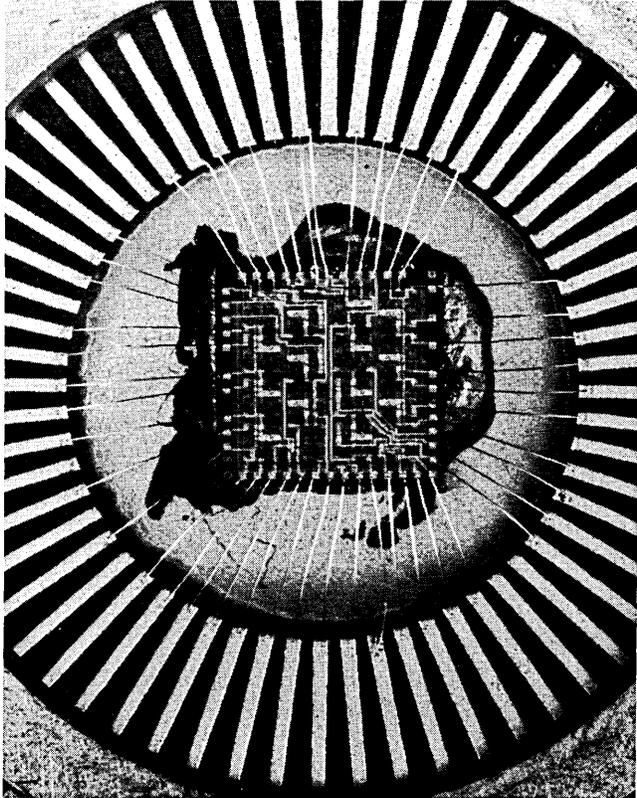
Typical LSI Complex Circuit in a 60-Lead Package
